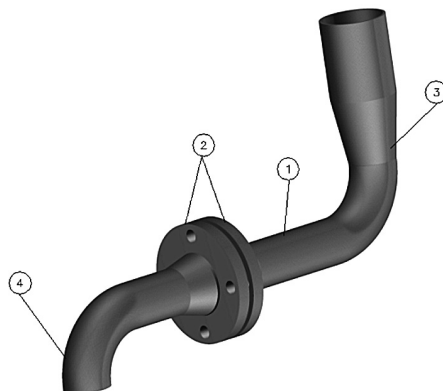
Pipeline design: 1 – pipe, 2 – flanges, 3 – reducing pipe, 4 – elbow
